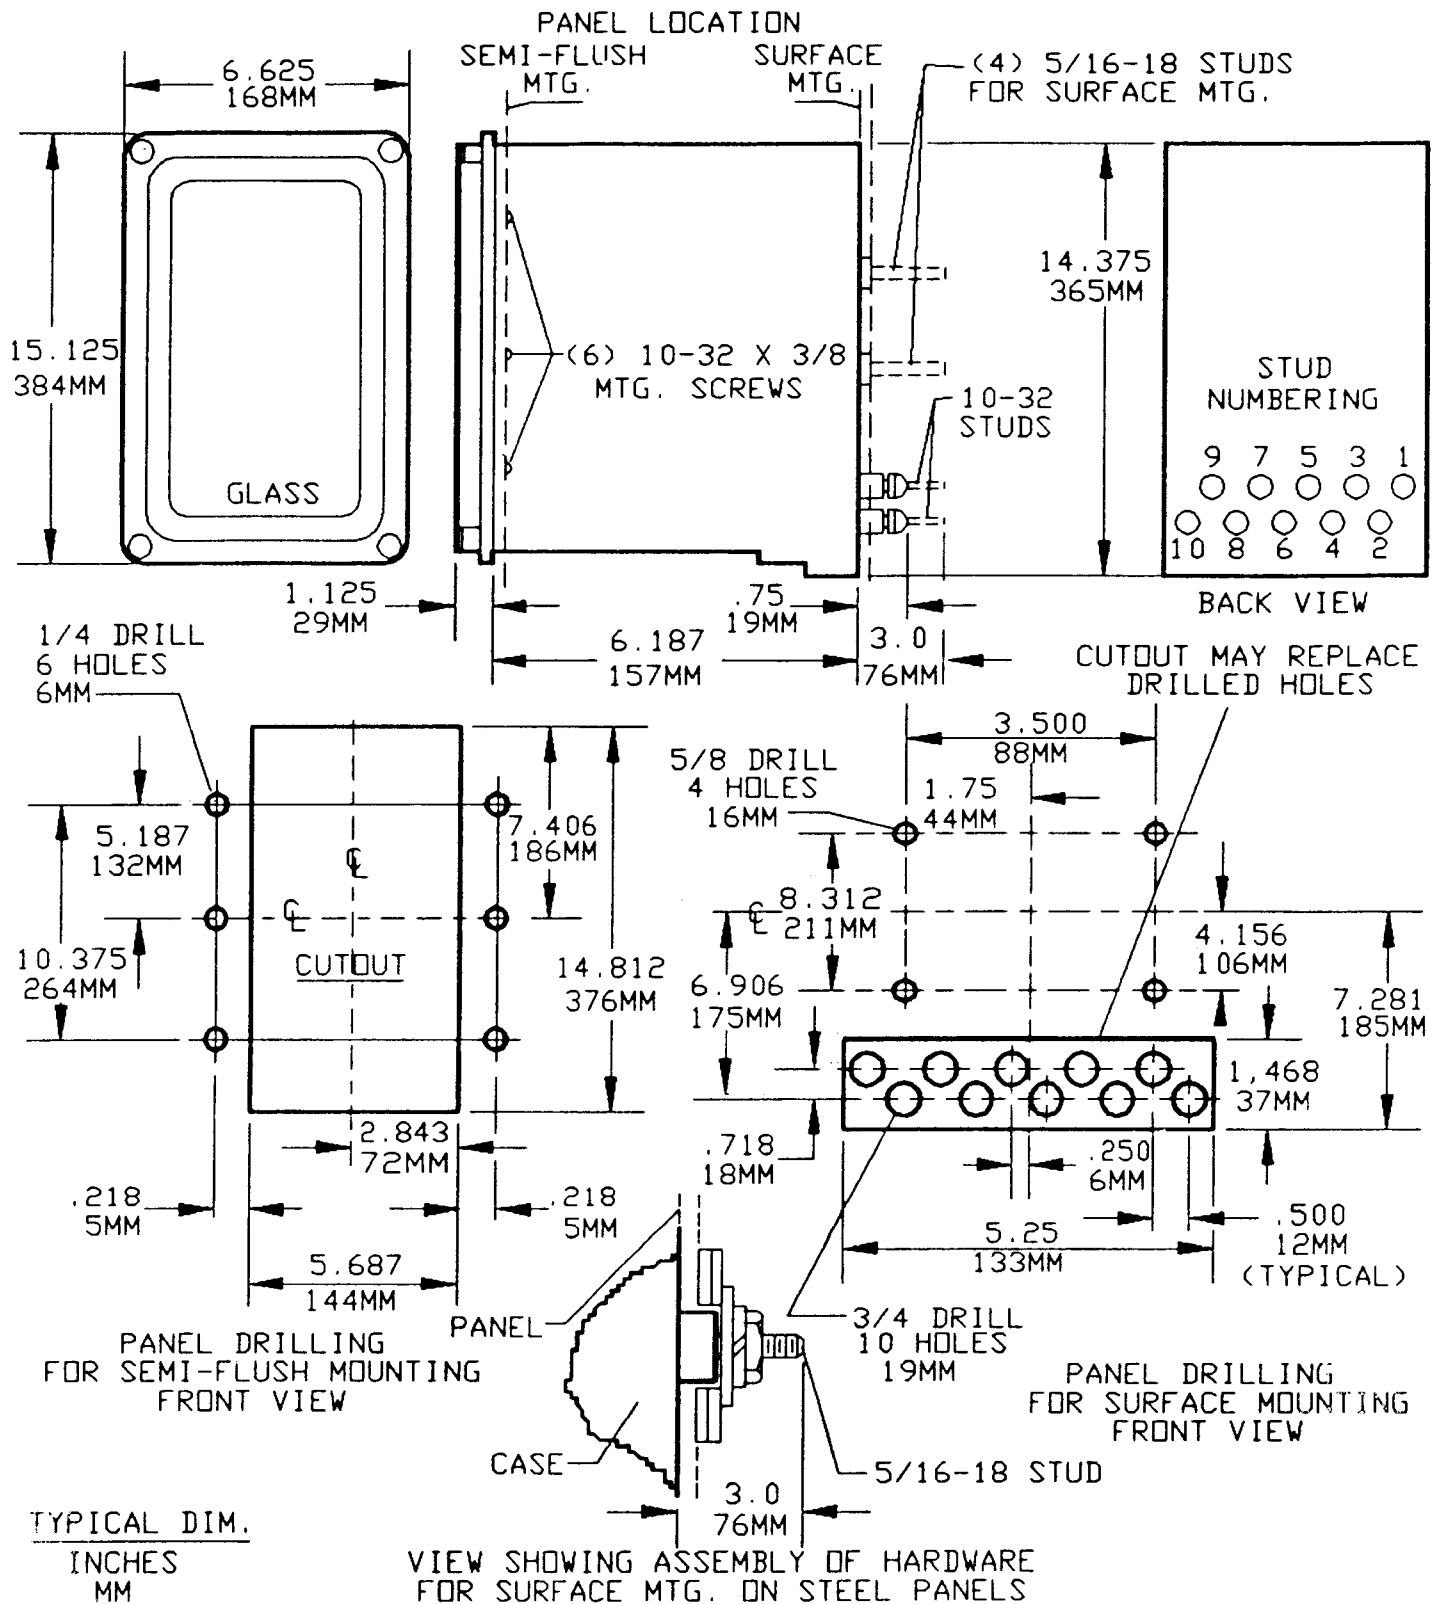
(K-6209273-5) Outline and Panel Drilling Dimensions for the CEB51B
